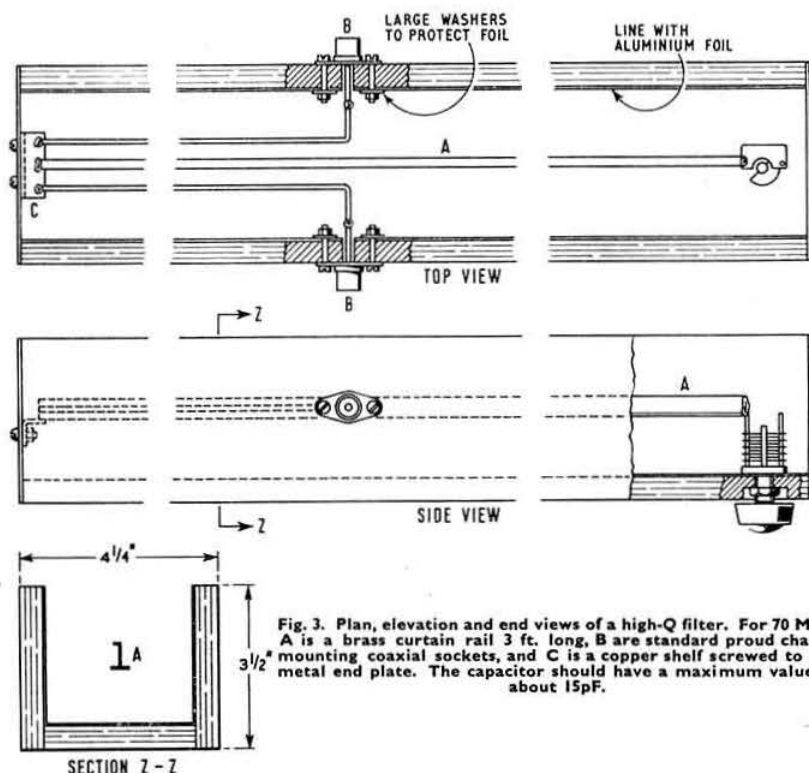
Plan, elevation and end views of a high-Q filter. For 70 Mc/s, A is a brass curtain rail 3 ft. long, B are standard proud chassis mounting coaxial sockets, and C is a copper shelf screwed to the metal end plate. The capacitor should have a maximum value of about 15pF.
